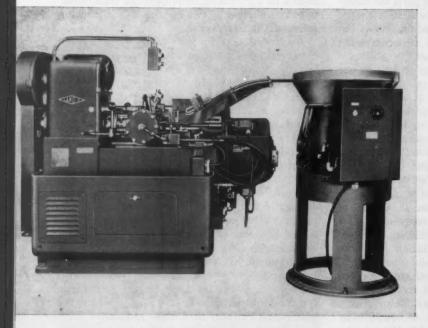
Landis No. 1 automatic machine for threading, reaming, and chamfering nipples
